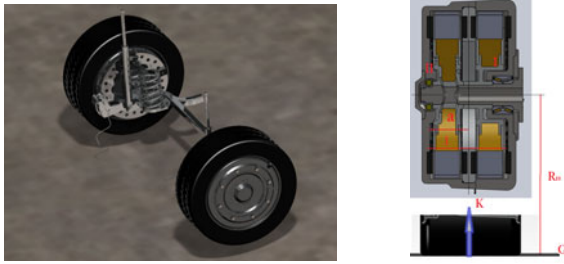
Left: EV architecture with in-wheel SR motors (on right side is Motor tyre model for calculating bearing loads)
